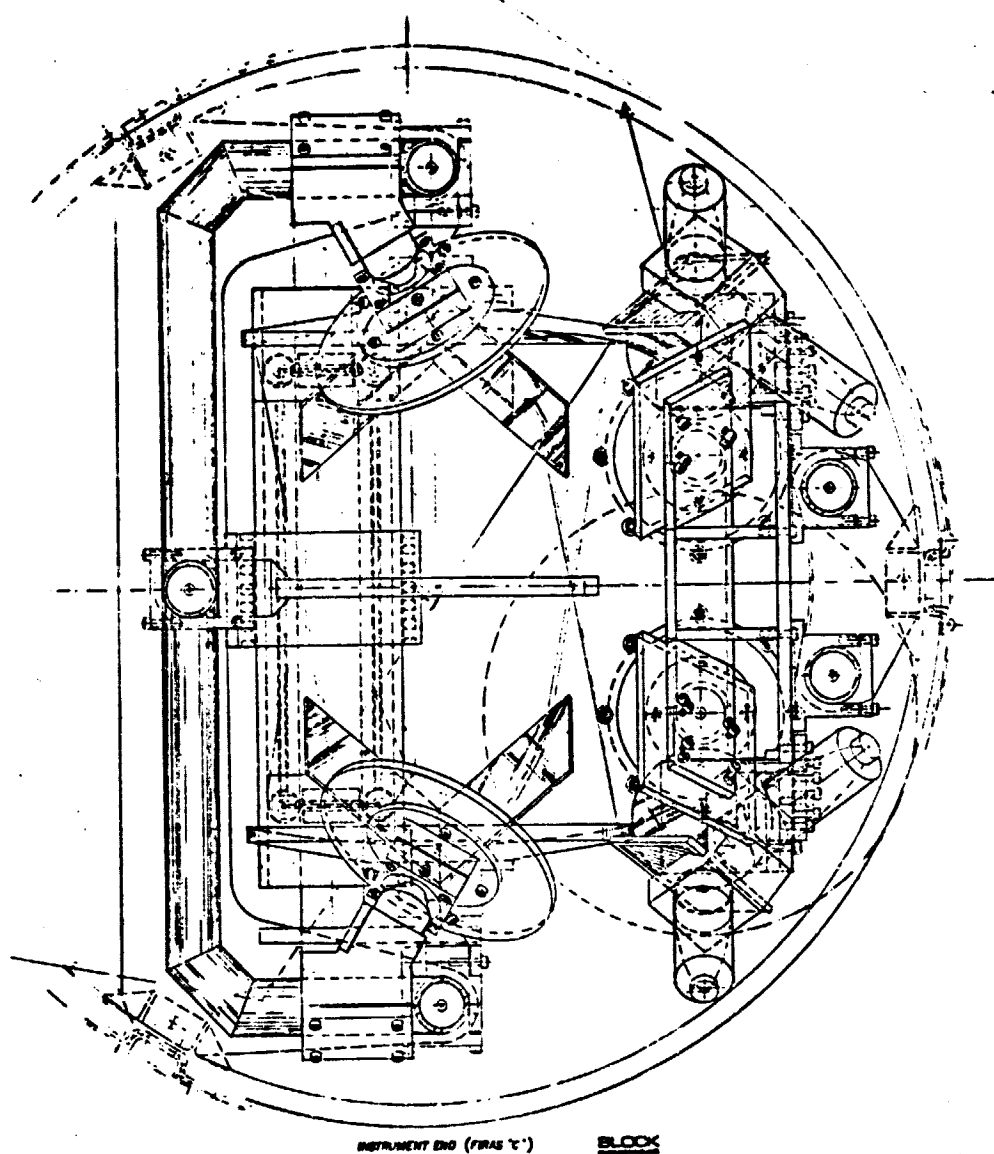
Instrument Mechanical Configuration, Bottom View
